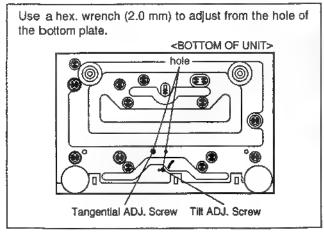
Adjustment Hole of the Bottom Plate
